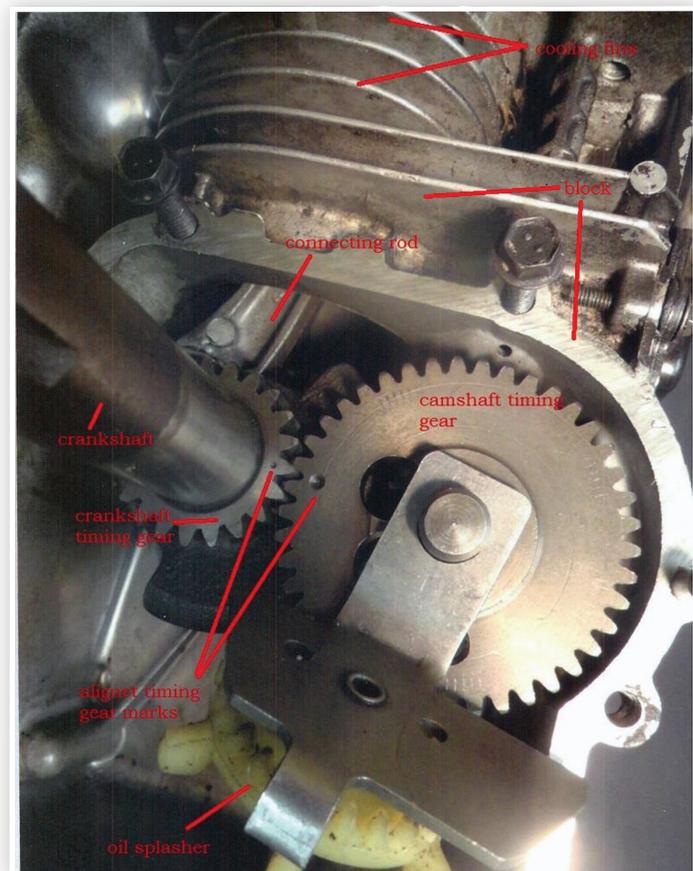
The alignment of the timing marks on the crankshaft timing gear (left) and the camshaft timing gear (right). Note the oil slinger, the plastic paddle wheel driven by the camshaft timing gear.
